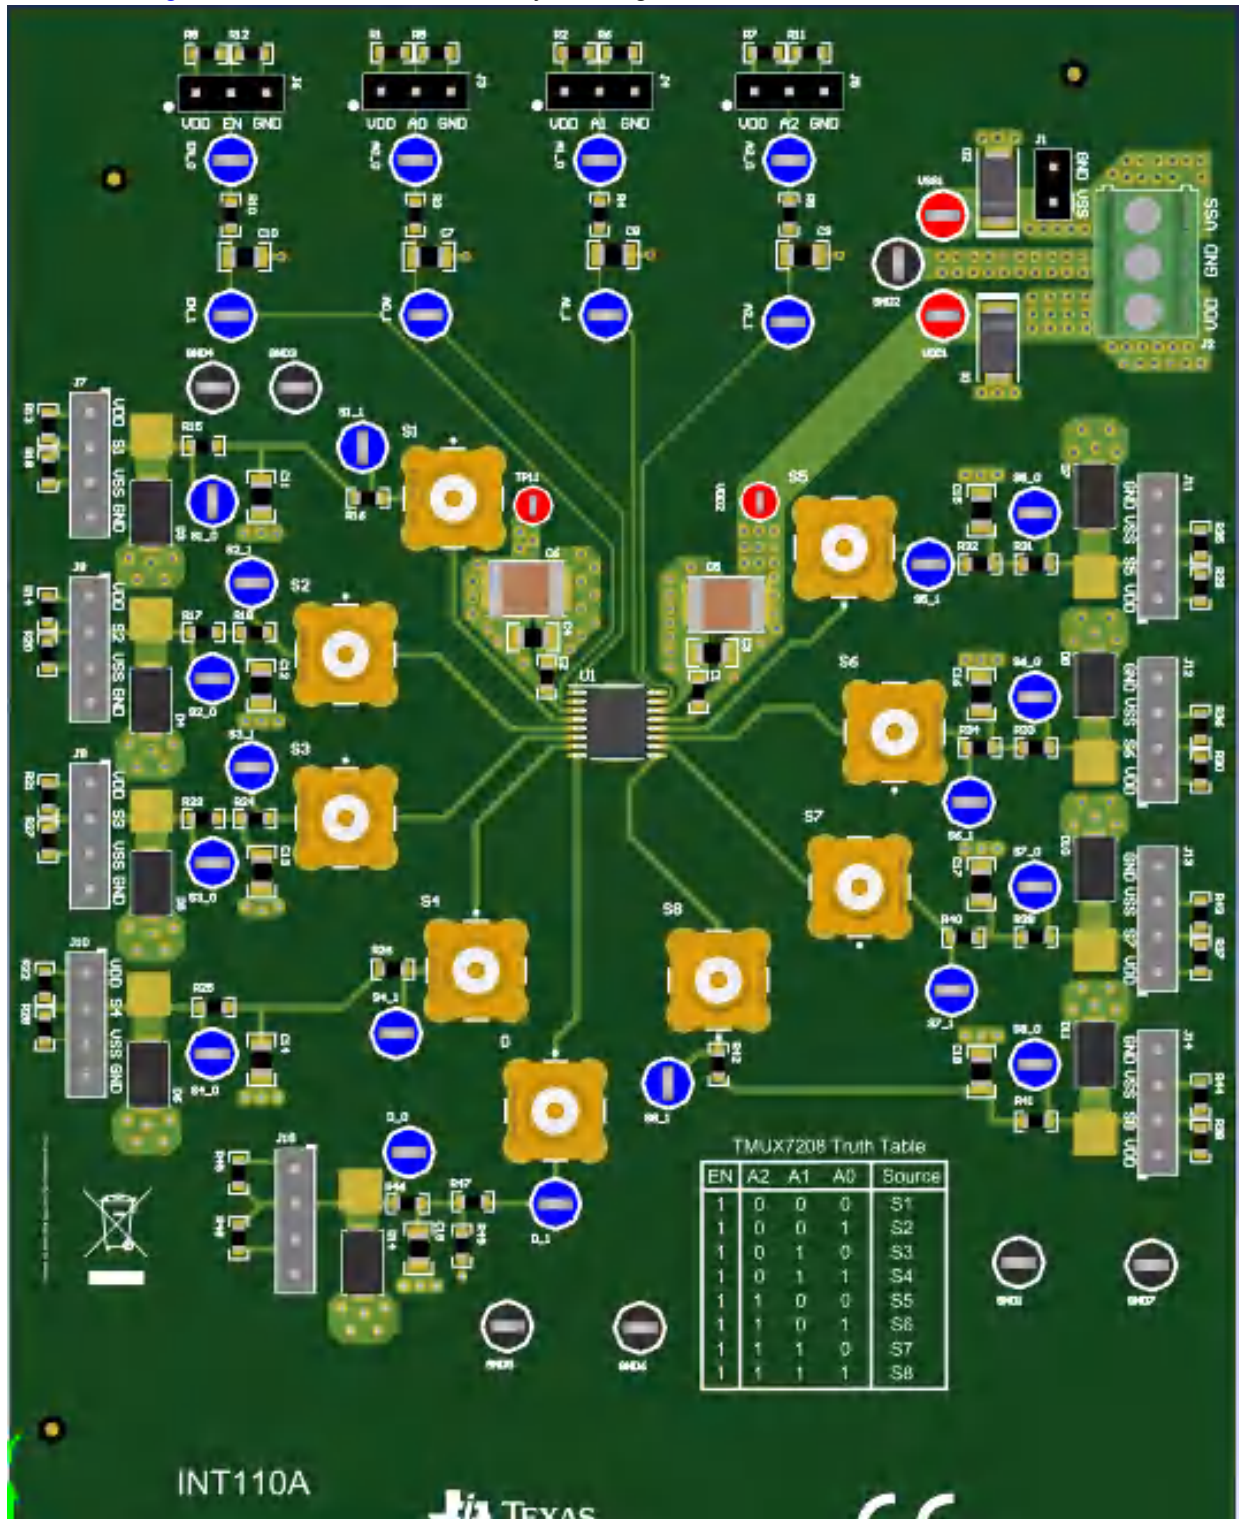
Top View Illustration of the TMUX7208EVM Layout
